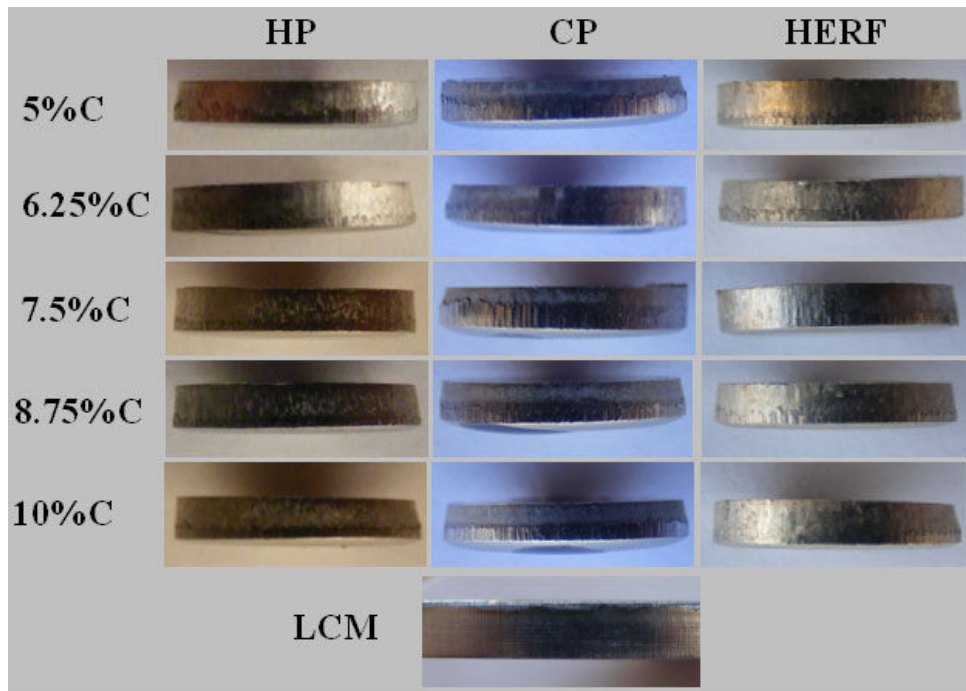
39 Shear and fracture surfaces of the stainless steel materials according to the press type and die clearances
